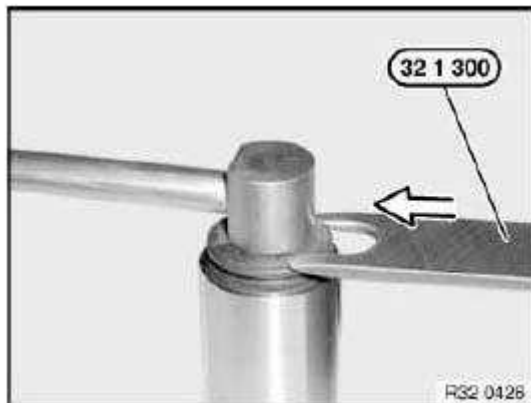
Sliding Special Tool (32 1 300) Between Metal Head And Rubber Lip Of Quick-Release Coupling
